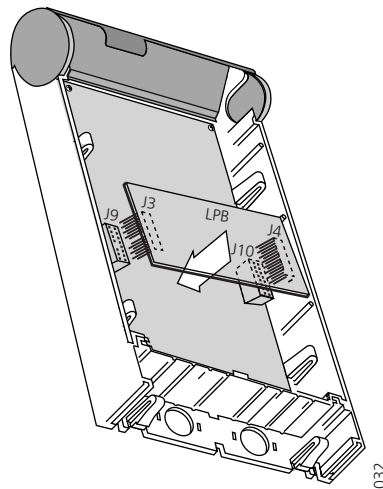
Mounting the LPB on an ELISE2 Circuit Board
